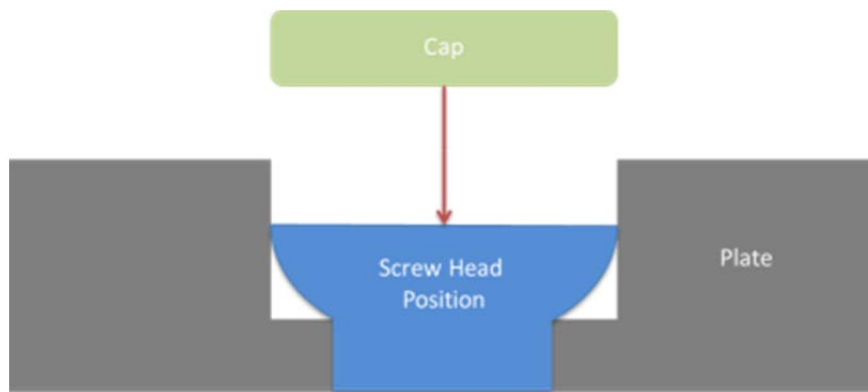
Cap Used as Locking Mechanism between Plate and Screw
